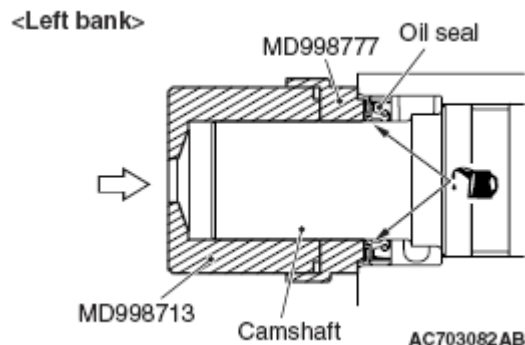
Fitting Camshaft Oil Seal Using Special Tools MD998713 And MD998777 - Left Bank
